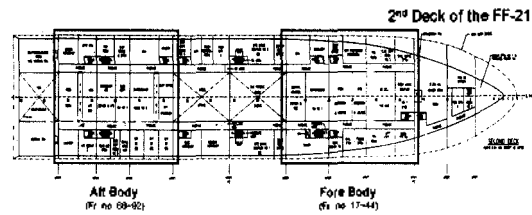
Compartment layout plan of the second deck of the FF-21.
